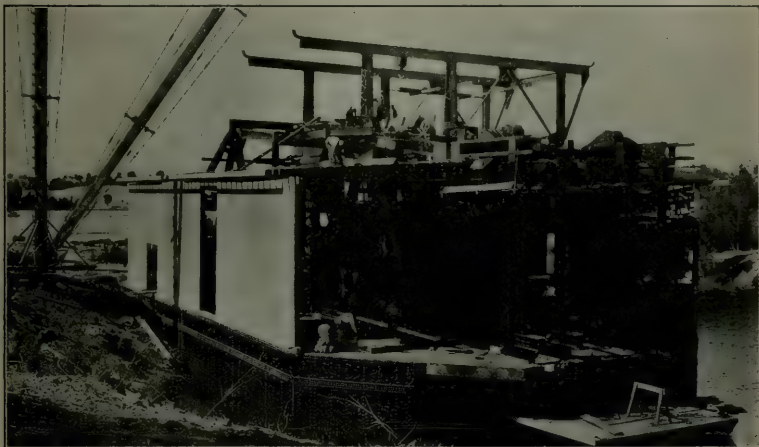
Pacific Gold Dredge under construction below Park's Bar Bridge on the Yuba River, Yuba County. September, 1916.
